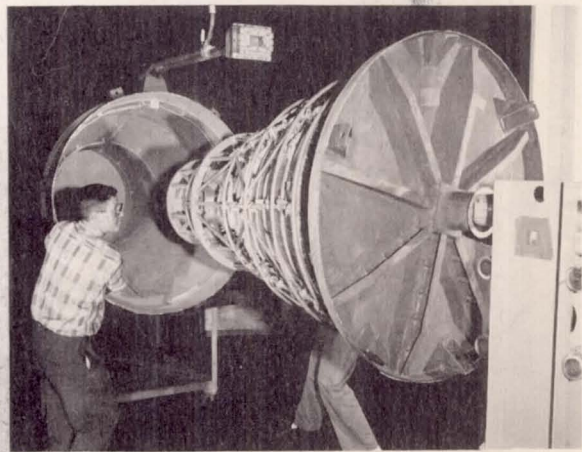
RL-10 thrust chamber retort loading. (Courtesy Pratt & Whitney Aircraft.)
